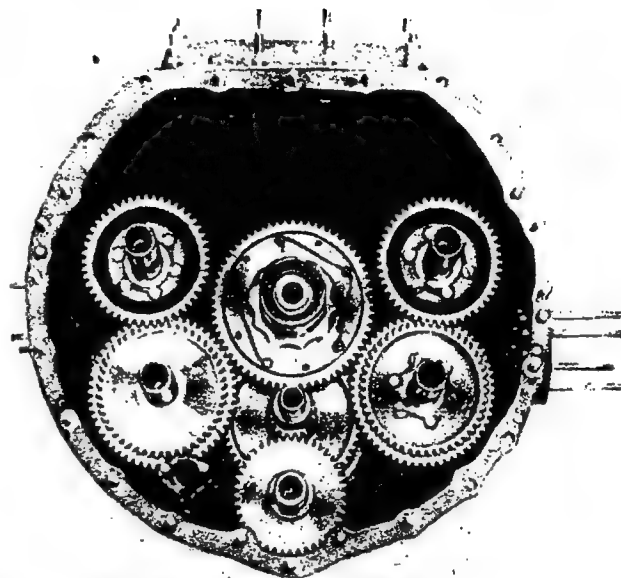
Location and Direction of Rotation of Accessory Drive Gears
